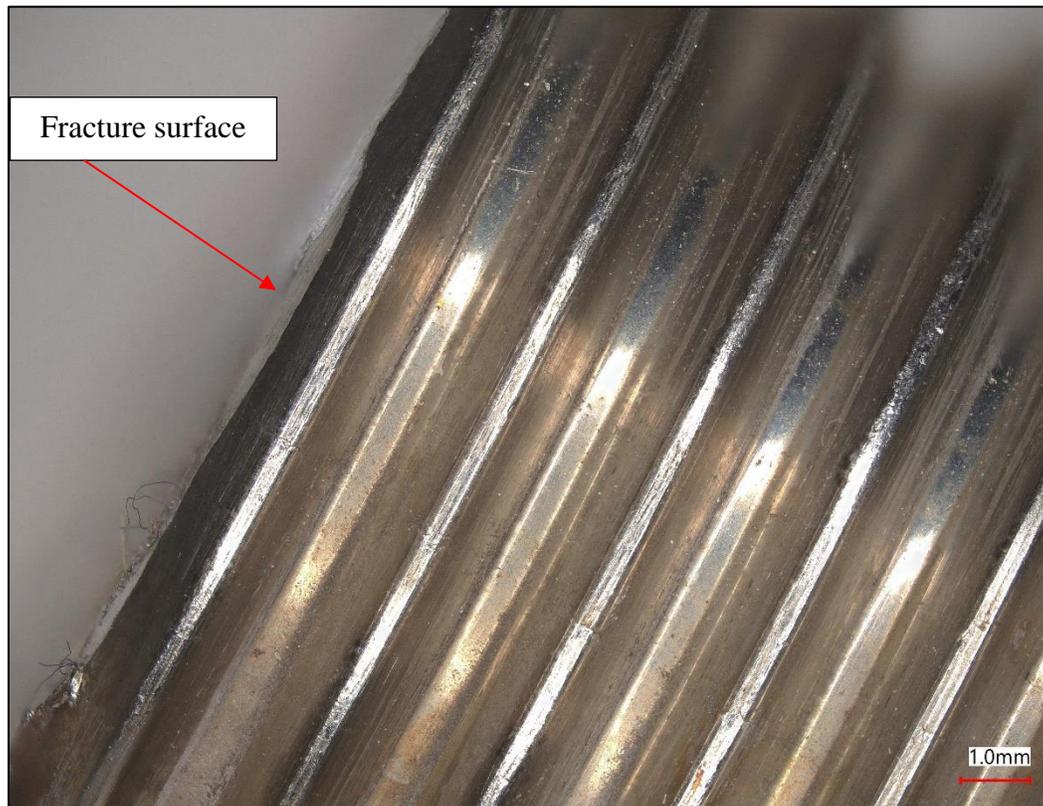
THREADS IN THE VICINITY OF THE FRACTURE SURFACE, BOLT C5
